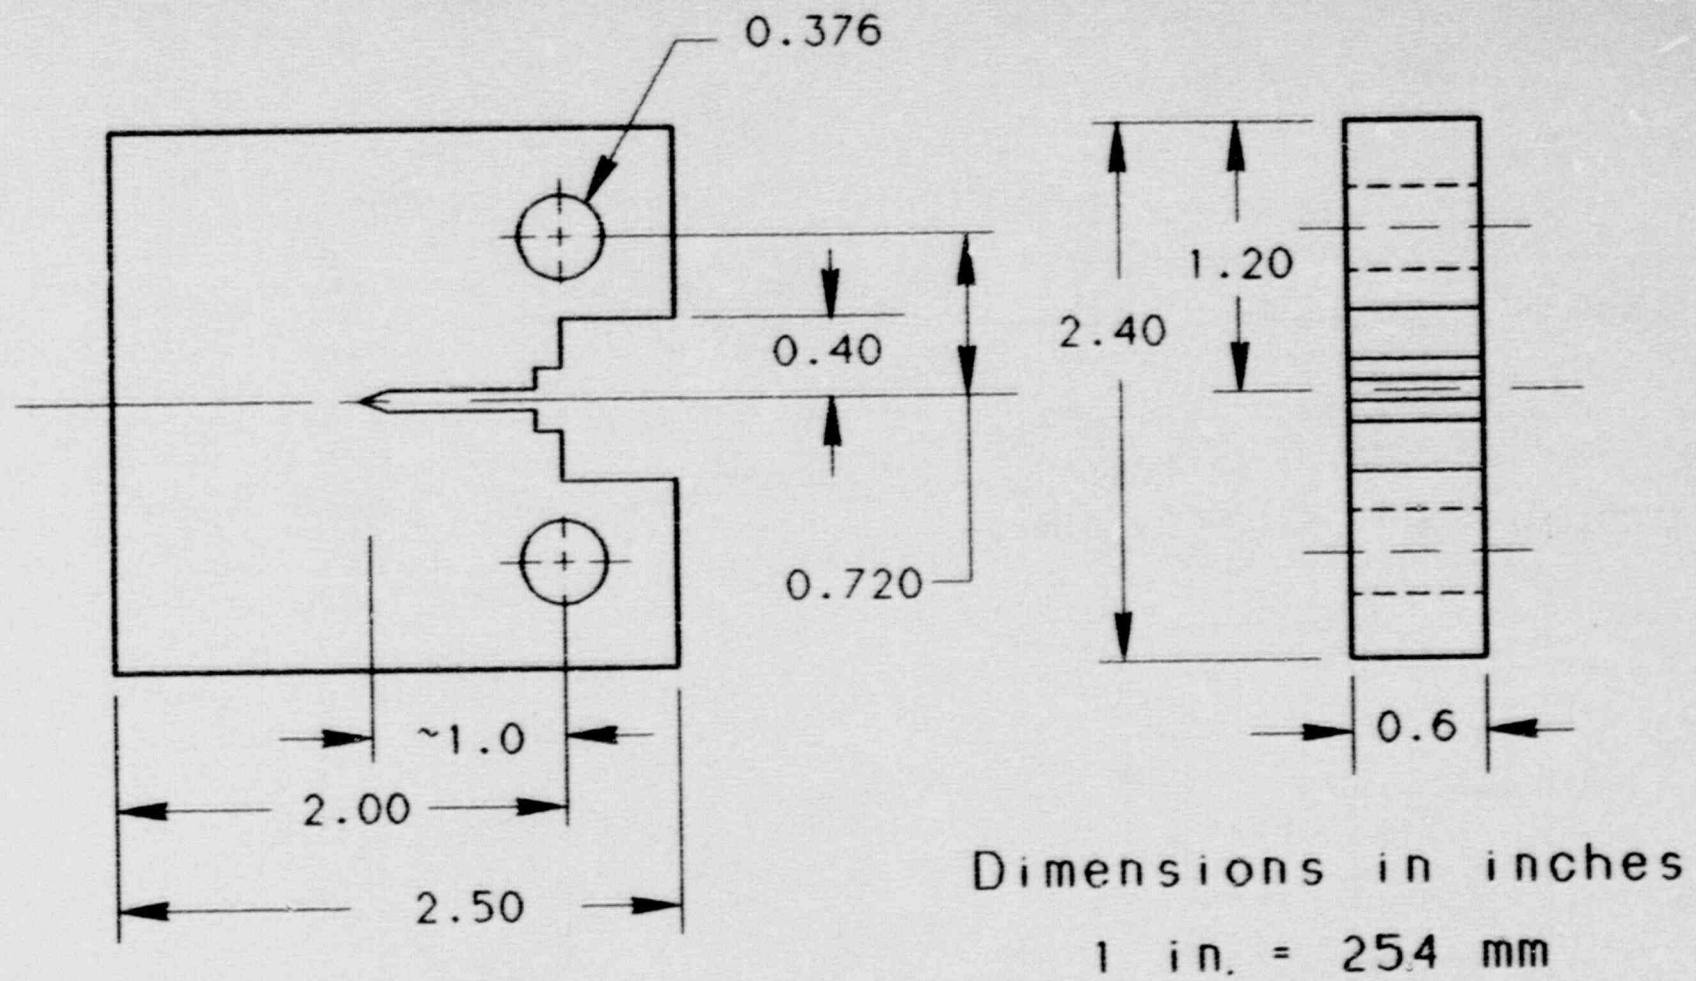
Fracture toughness tests of A 106 Gr. B (Heat ZP14) used this IT-CT specimen design with a thickness of 15 mm (0.6 in.).
